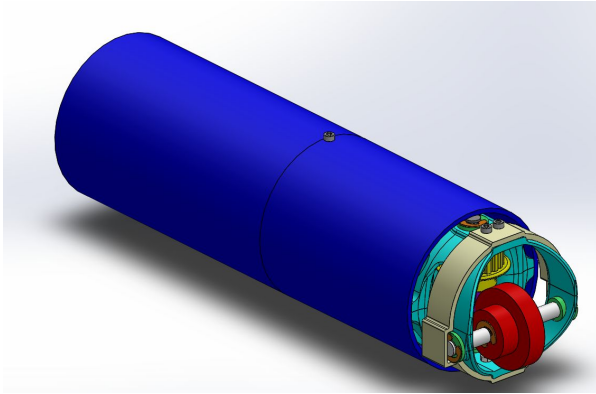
Full overview of CAD model for the final design without the Ada Hand, which would be rigidly attached to the shaft holding the worm gear in red.
